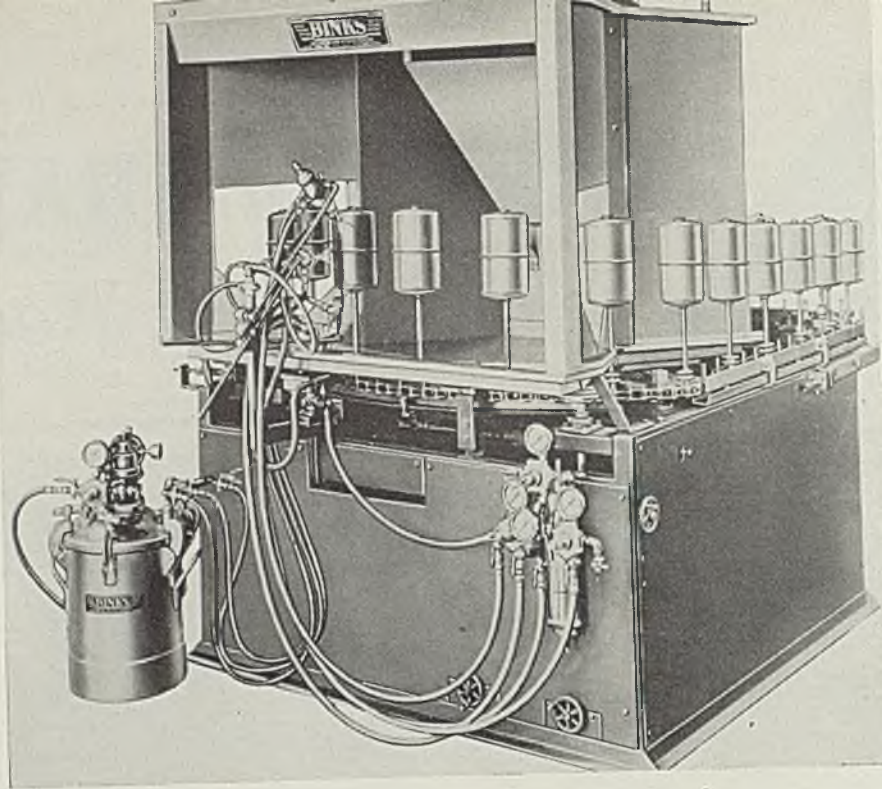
This Binks automatic rotary spindle finishing machine is readily adaptable to handling many items. It utilizes three spray guns to apply simultaneously finish on top, side and bottom of the cylinders shown here. As many as 20,000 units can be painted per day in a setup like this
